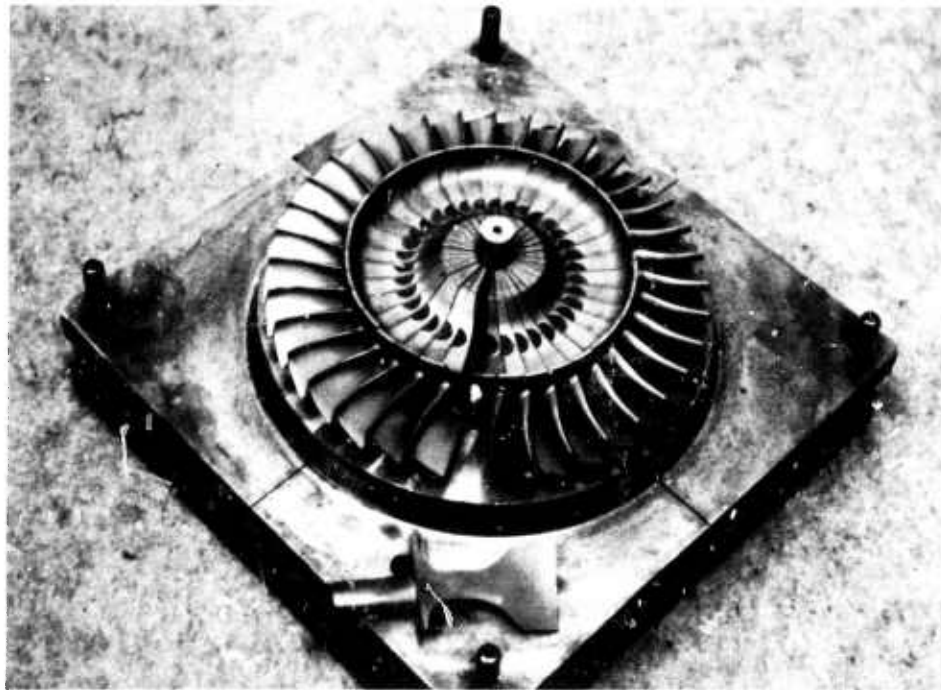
Assembly of Molded Silicon Turbine Rotor Blades
